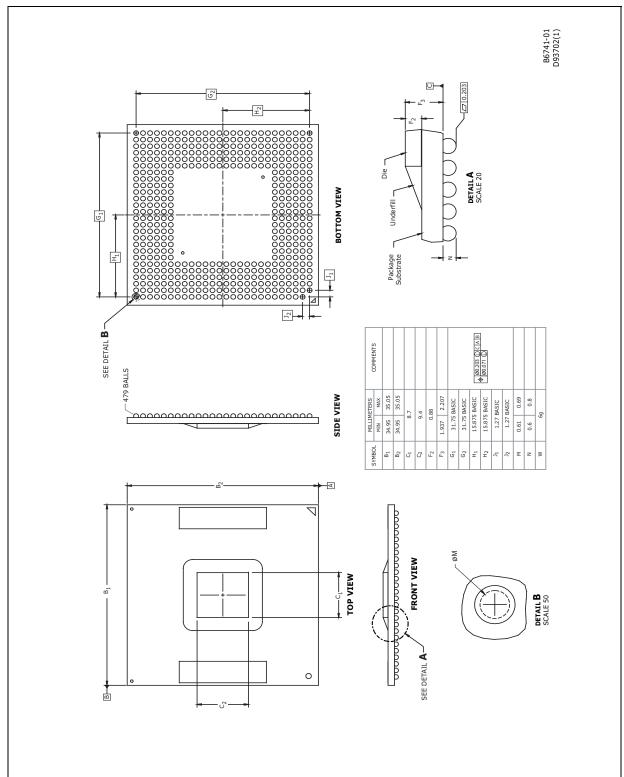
3-MB Die Micro-FCBGA Processor Package Drawing (Sheet 2 of 2)
